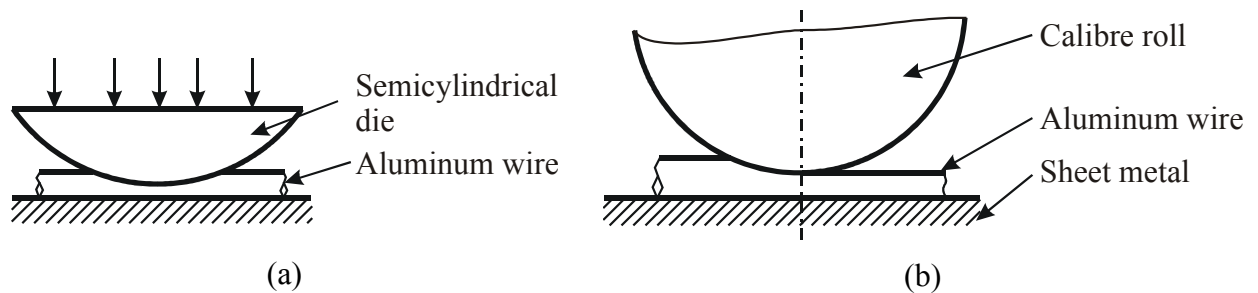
Wire compressed with semicylindrical die (a) and wire inserted between calibre roll and sheet metal [85].
